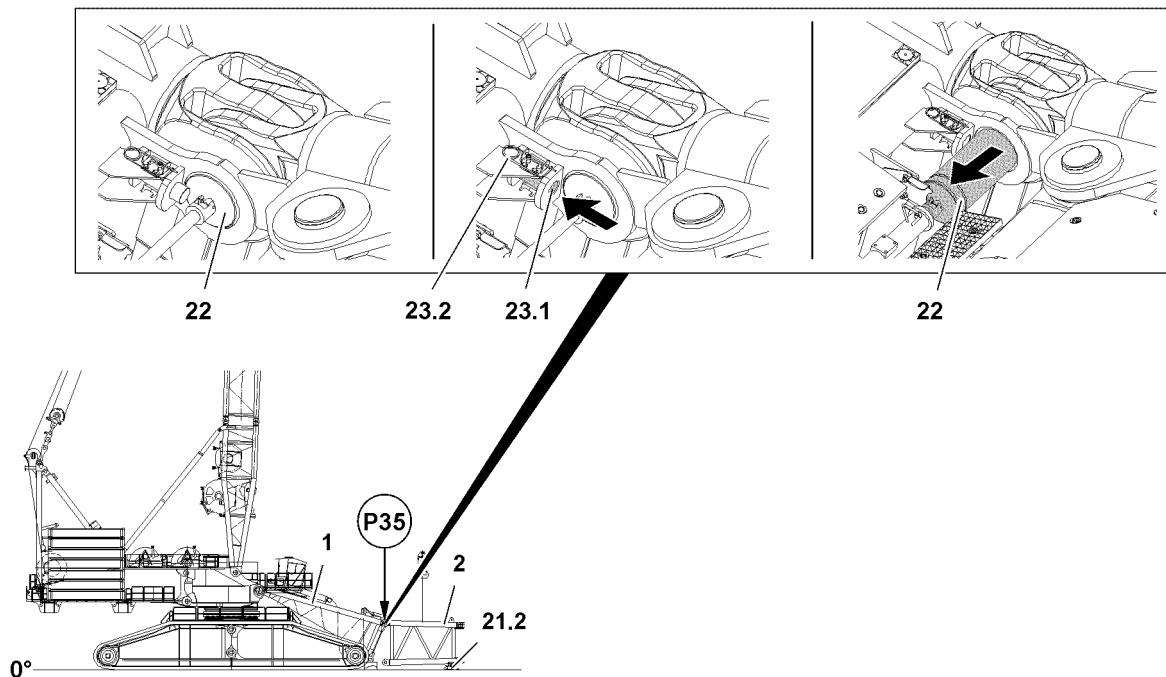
Disassembling the lower P-adapter on the S-pivot section
